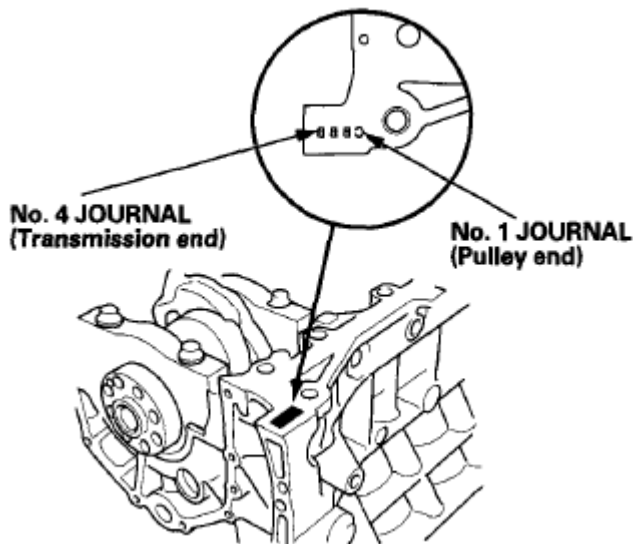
Main Bearing Selection Identifying Block Bore Code Location
